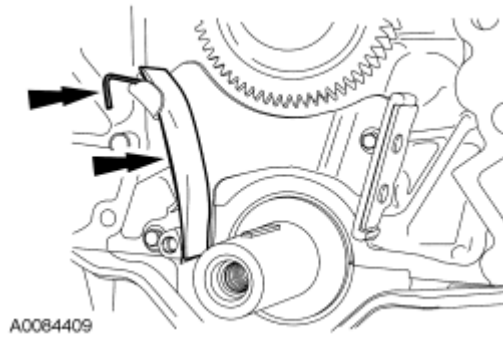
Compressing Tensioner Pad And Installing Retaining Pin
